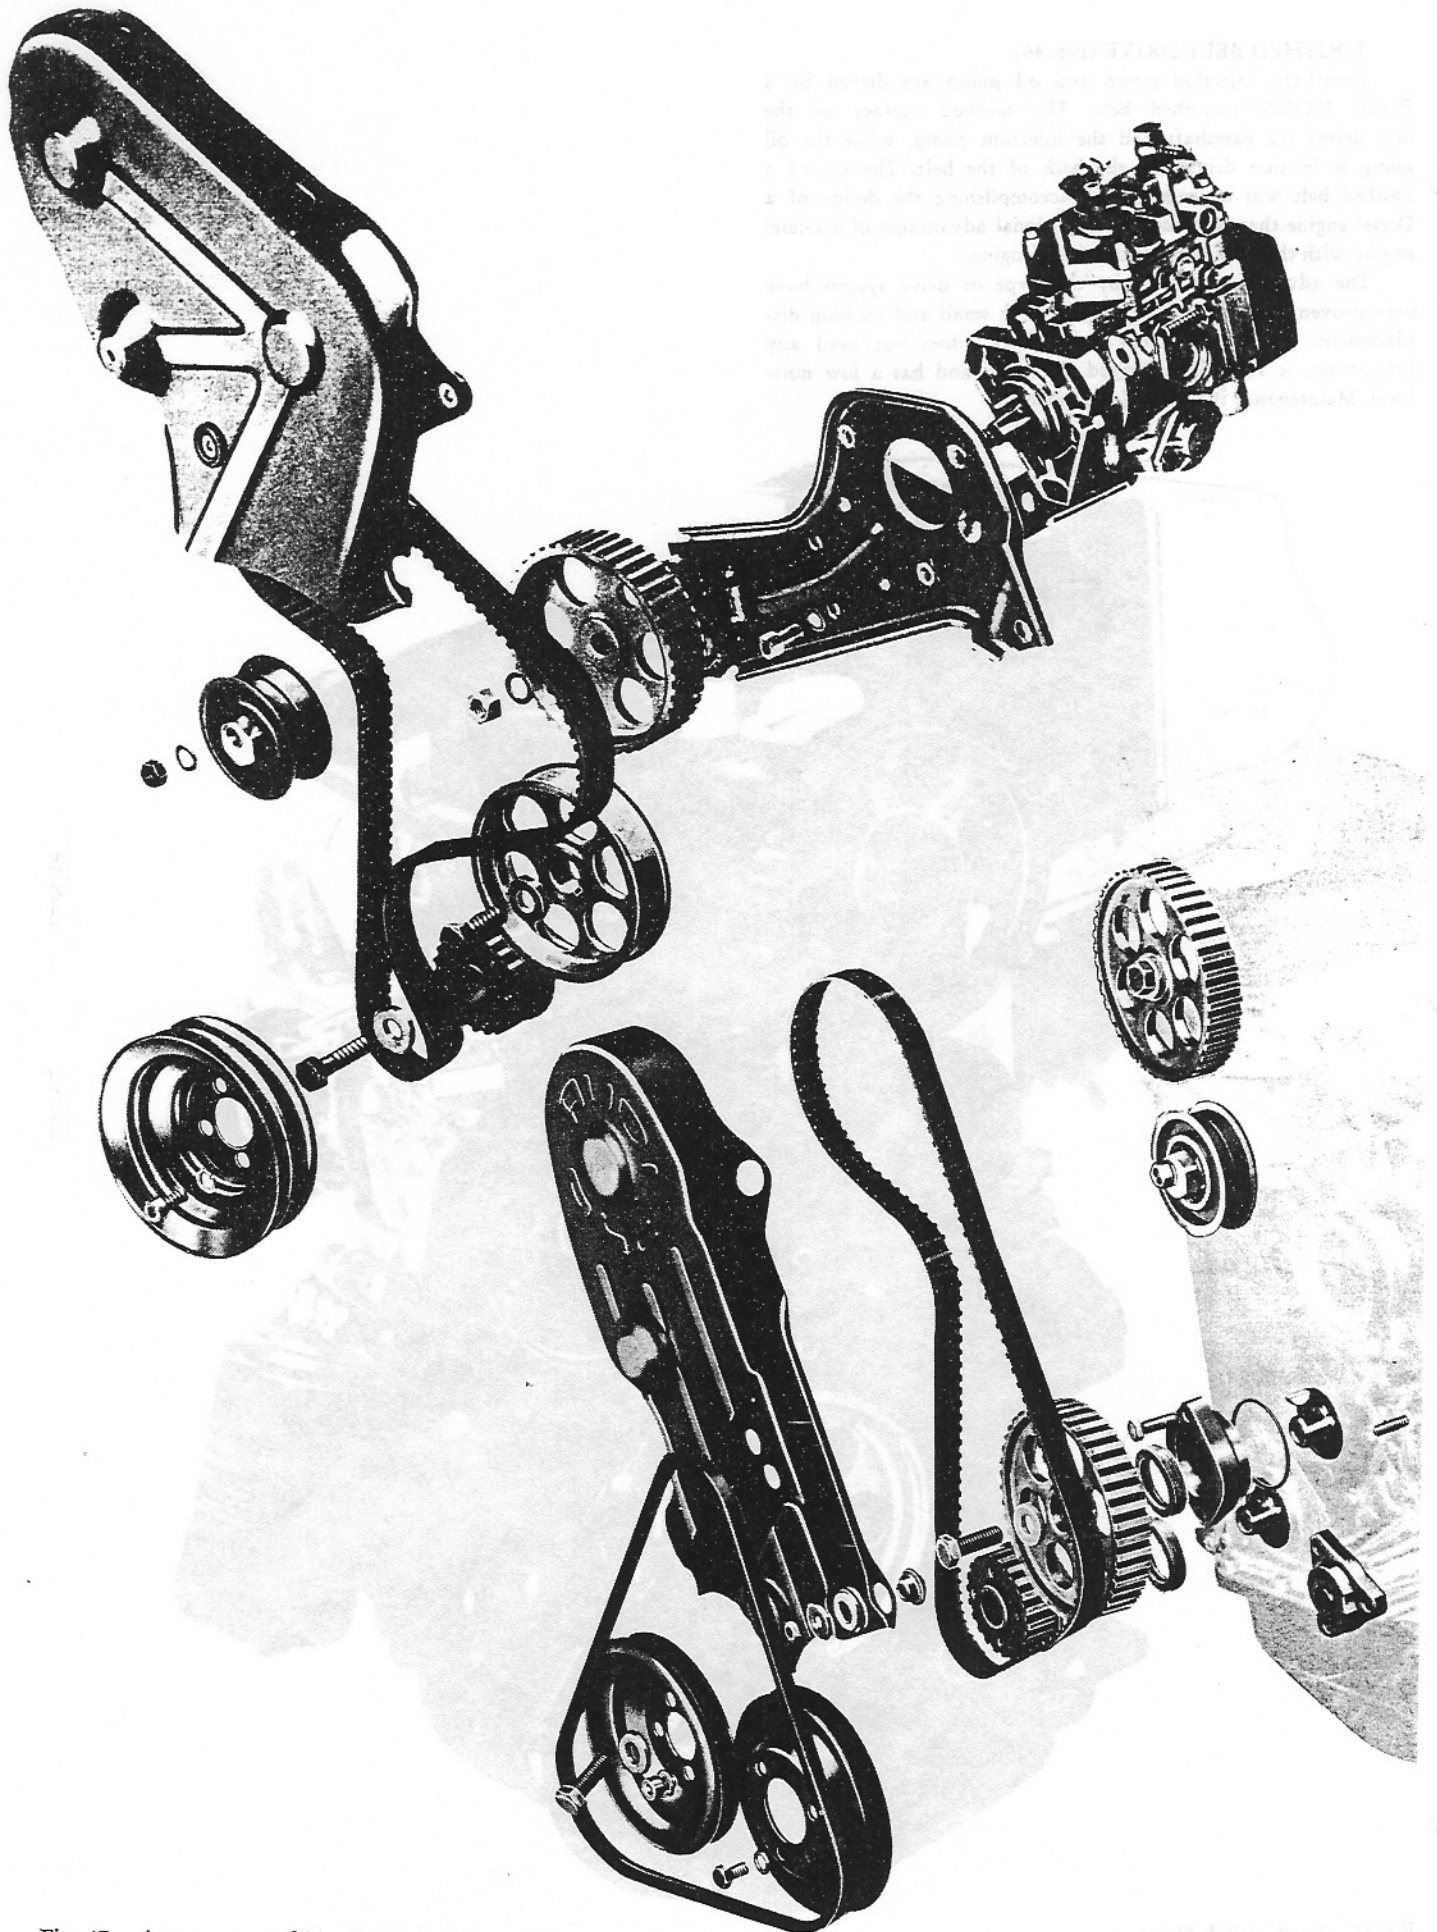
Arrangement of Toothed Belt Drive: VW Diesel- Spark Ignition Engine
